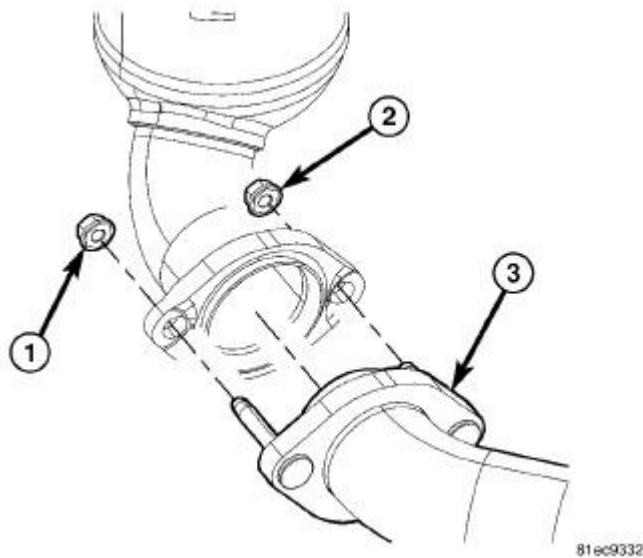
Front Maniverter-To-Cross Under Fasteners
